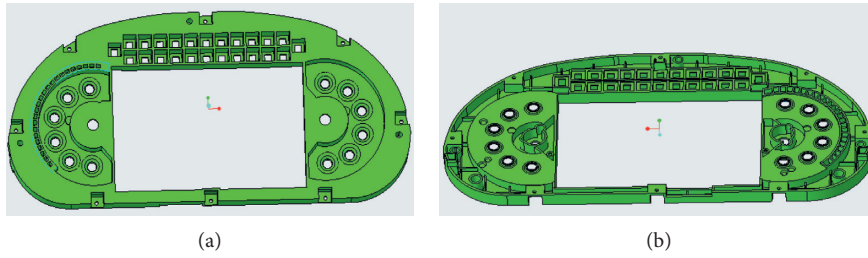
3D model of automobile instrument light guide bracket: (a) front view and (b) the reverse view.
